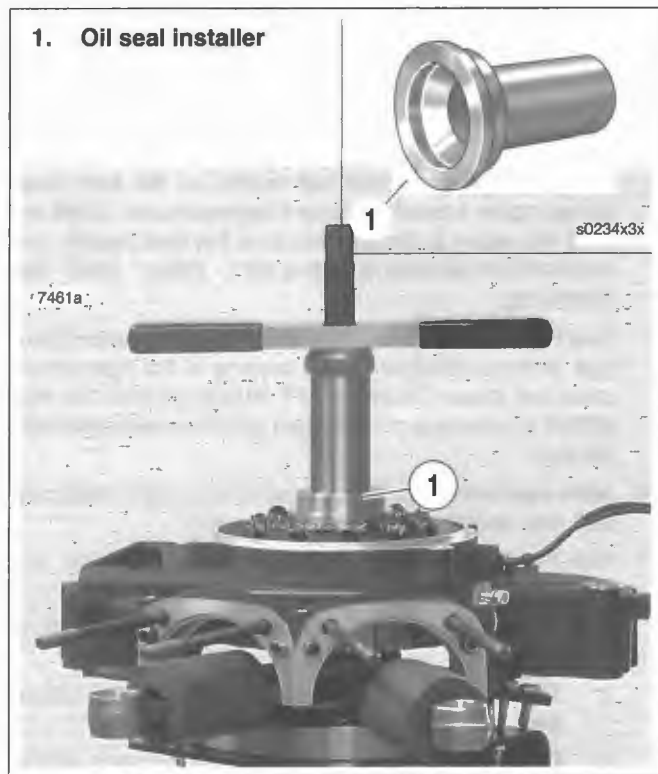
Sprocket Shaft Oil Seal Installer (Part No. HD-39361-A)
